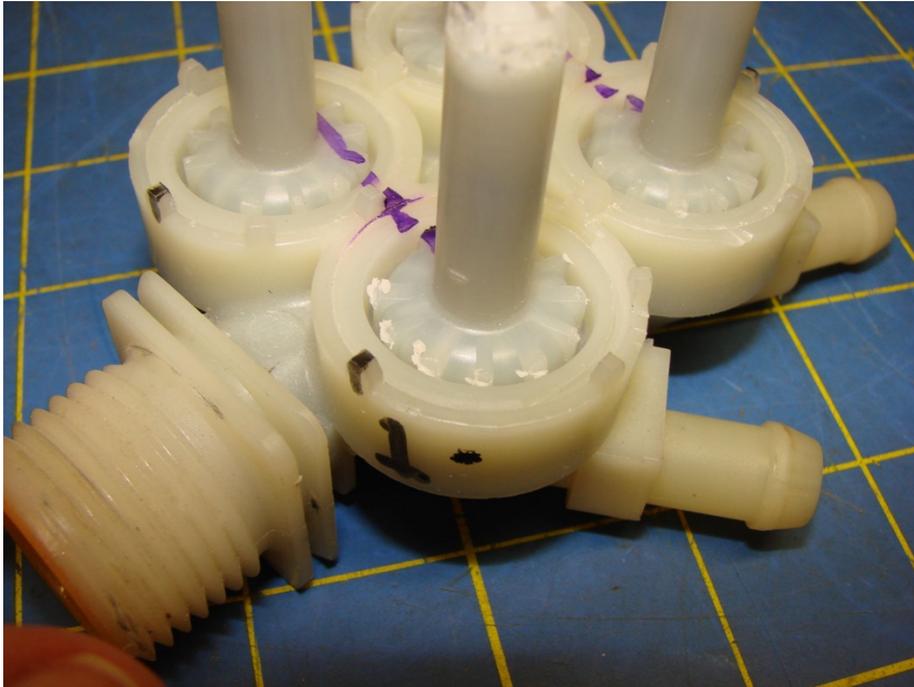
The solenoid has been removed, exposing the valve body. The upper body screws off.
